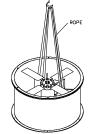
Single Fan Tower Fork lifting Figure A-4: Single Fan Tower Lifting
